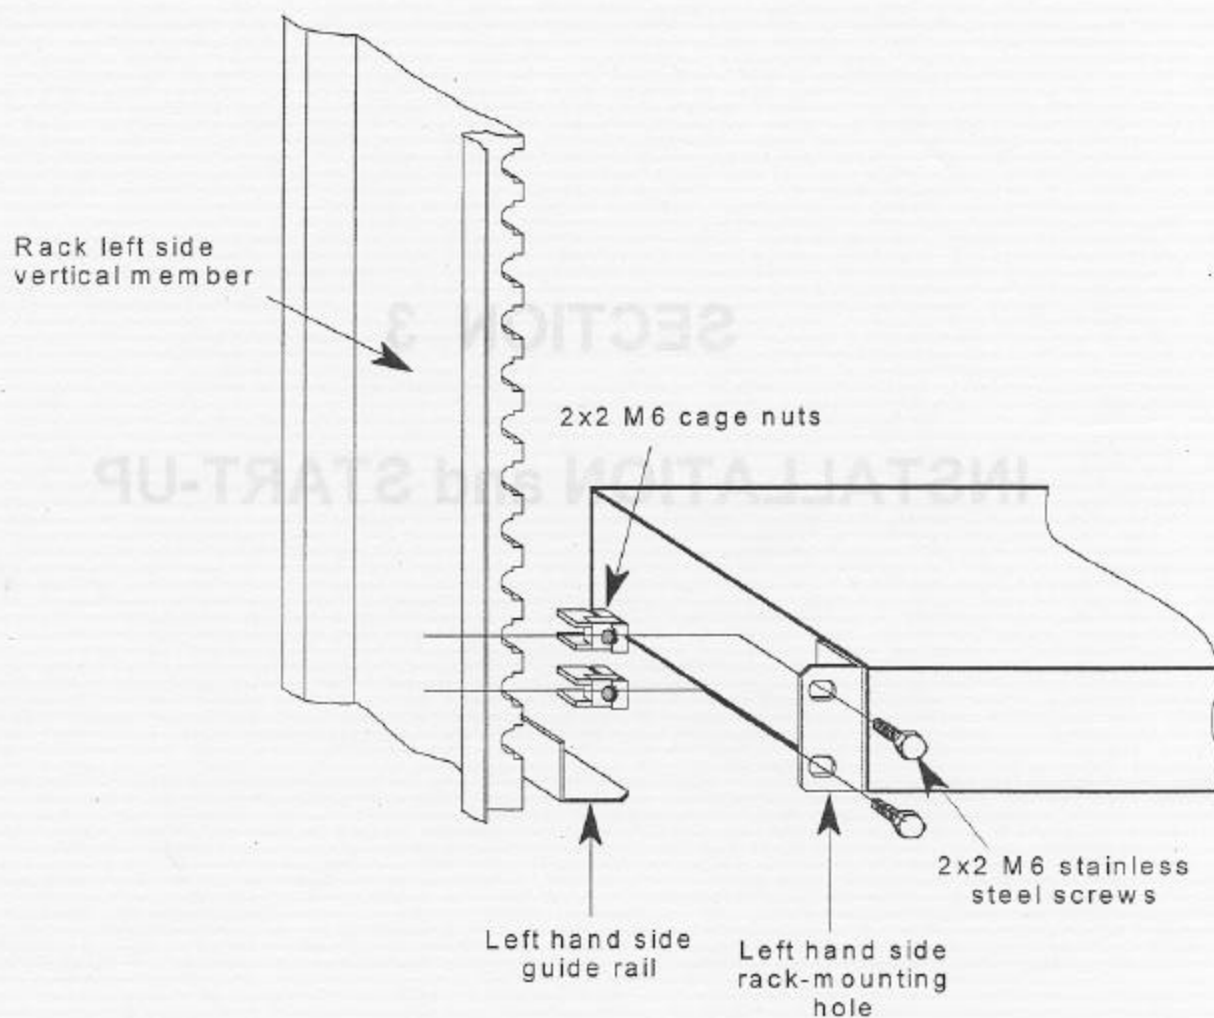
PQM 2100 Unit 19-inch Rack-mounting
